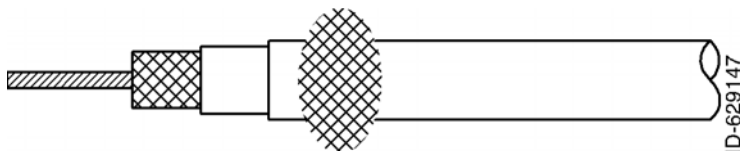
(Sheet 1 of 1) Quadraxial Cable Preparation
